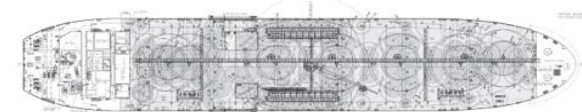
Plan view of the upper deck, showing the dangerous areas marked with grey color.
